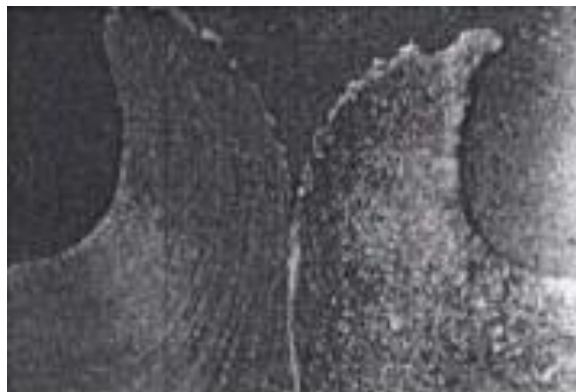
Macrostructure of FW welded AISI 430 Metals.
